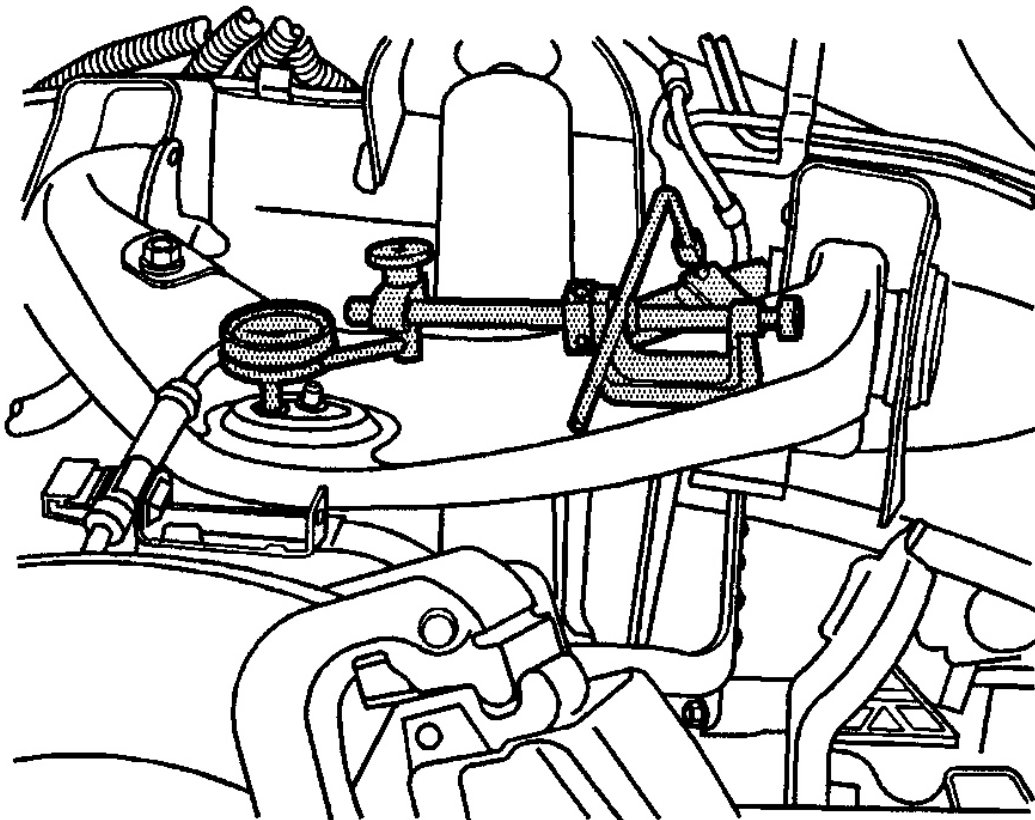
Positioning Dial Indicator To Lower Ball Joint
